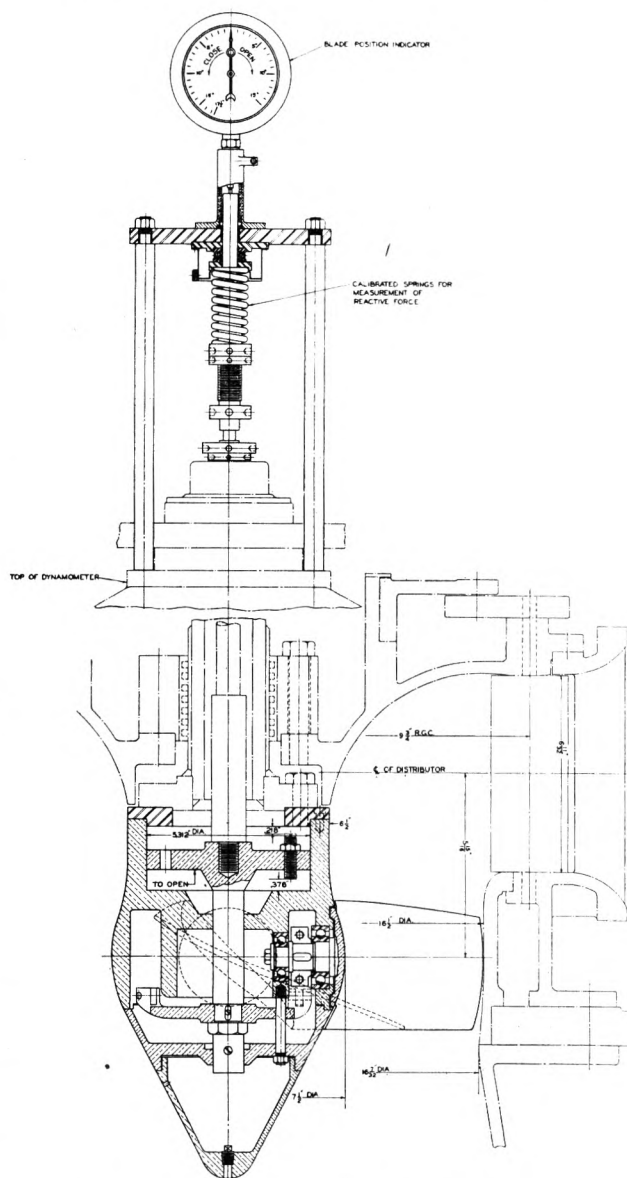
SECTIONAL VIEW OF 16 1/2-IN. TEST MODEL
